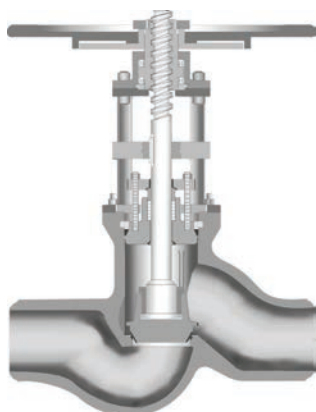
B Globe, Butt Weld Ends
